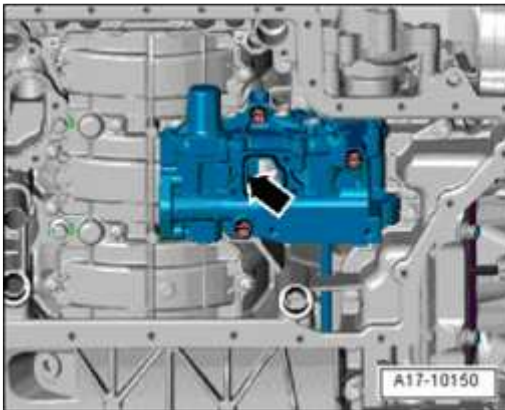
Checking Whether Drive Shaft Is Friction Locked To Oil Pump
